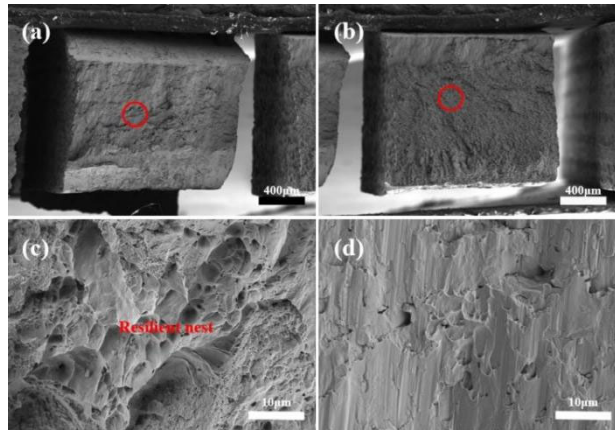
Macroscopic and microscopic morphologies of the Al5Ti10 fracture surface: (a) heat-affected zone; (b) cladding layer; (c) magnified view of the area circled in white in (a); (d) magnified view of the area circled in white in (b)
